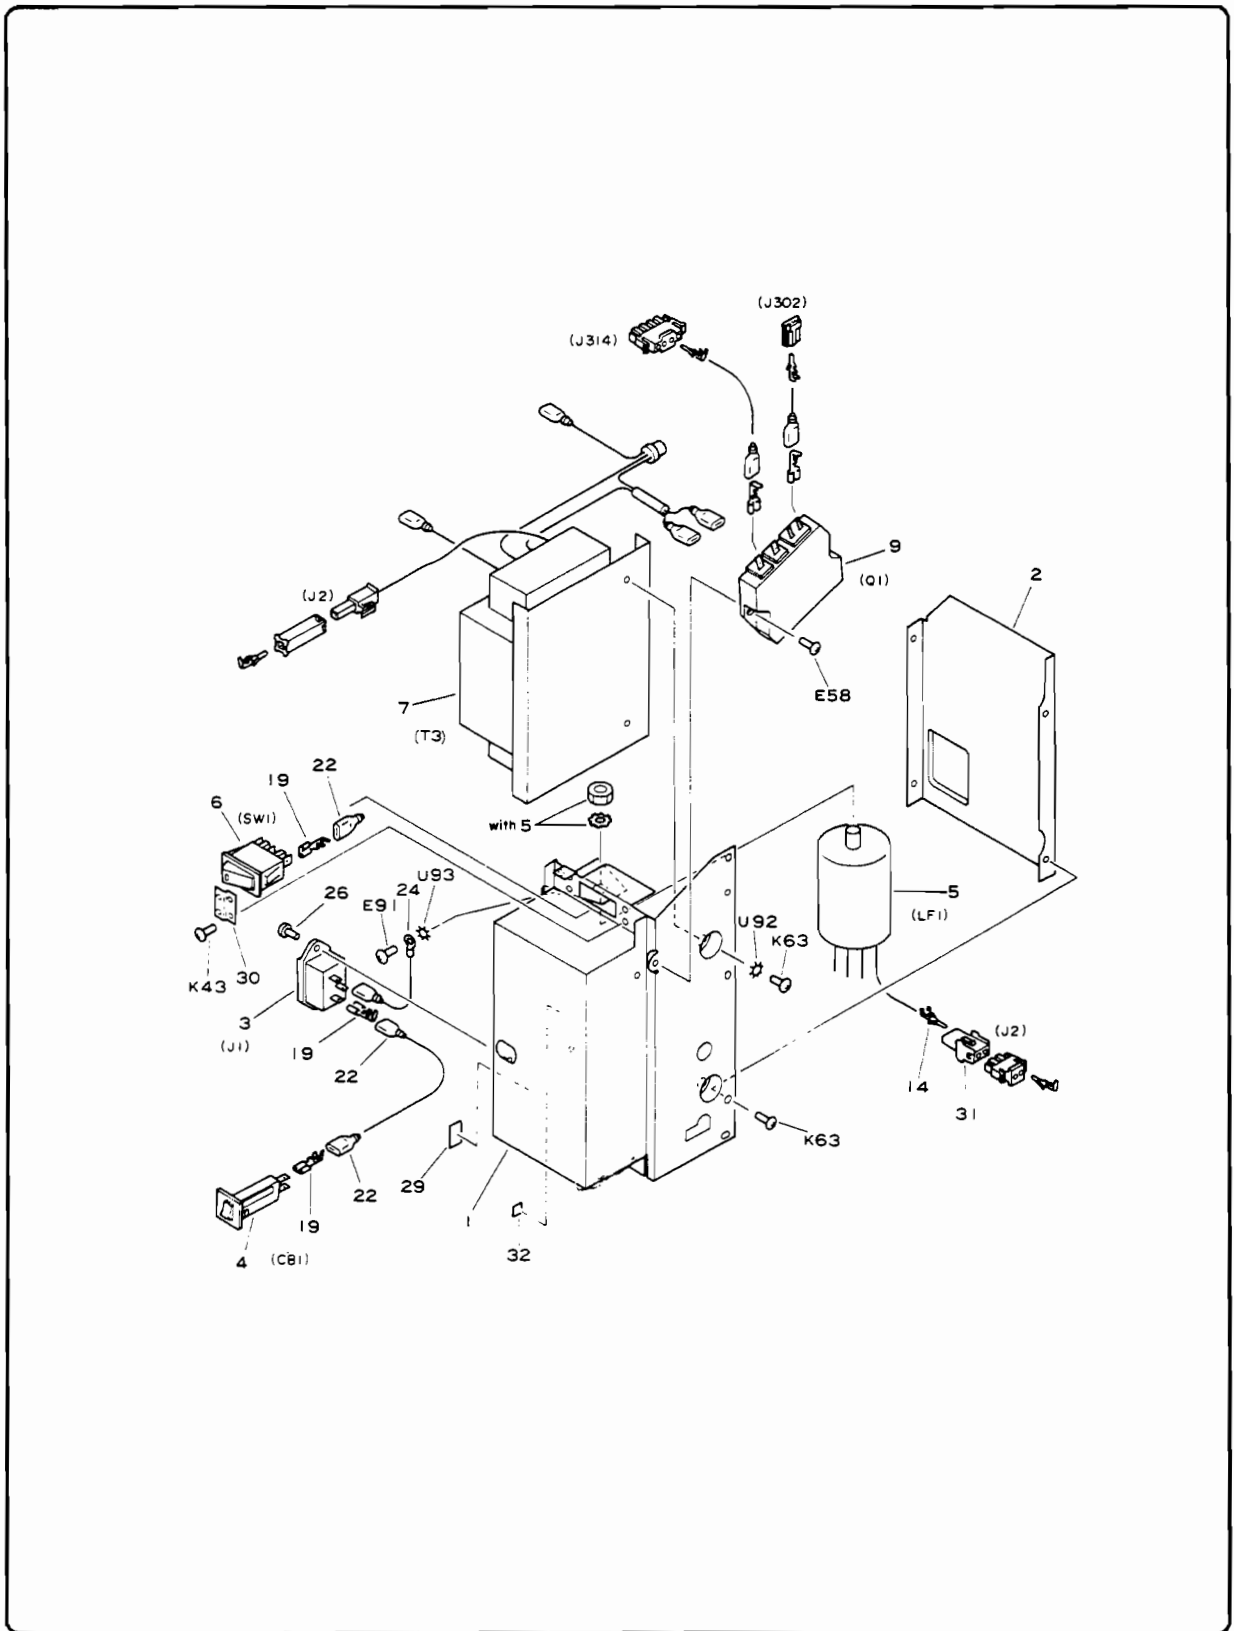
8. Power Cord Terminal Assembly (220/240V)
